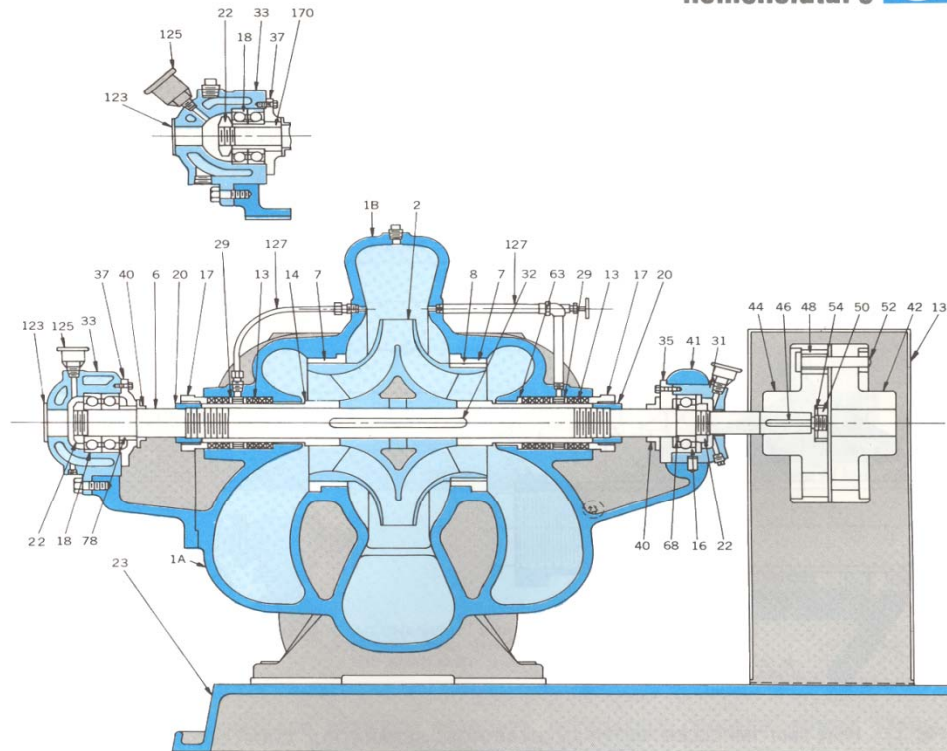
(Part One) IMPELLER BETWEEN BEARINGS, SEPARATELY COUPLED, SINGLE STAGE AXIAL (HORIZONTAL) SPLIT CASE
